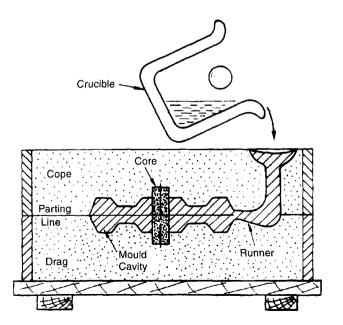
Sand casting. Liquid metal is poured into a split sand mould.
